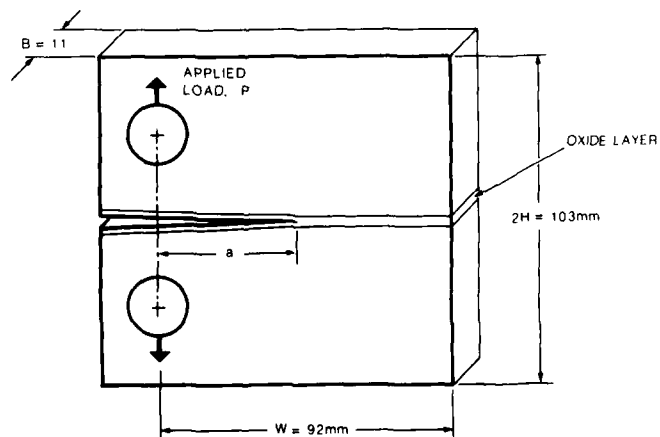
Modified Compact Specimen for Brittle Coating Tests
